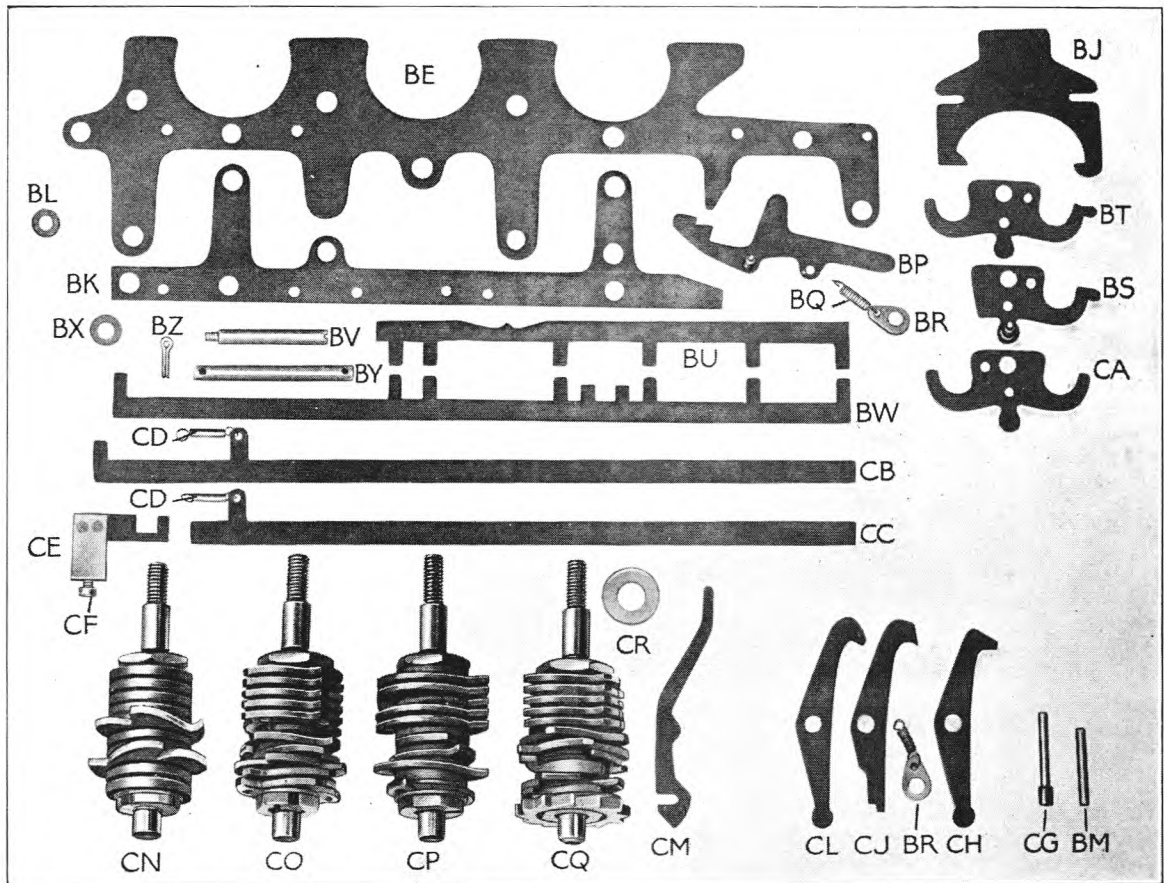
TRANSFER UNIT COMPONENTS (For C.T. Keyboards)
